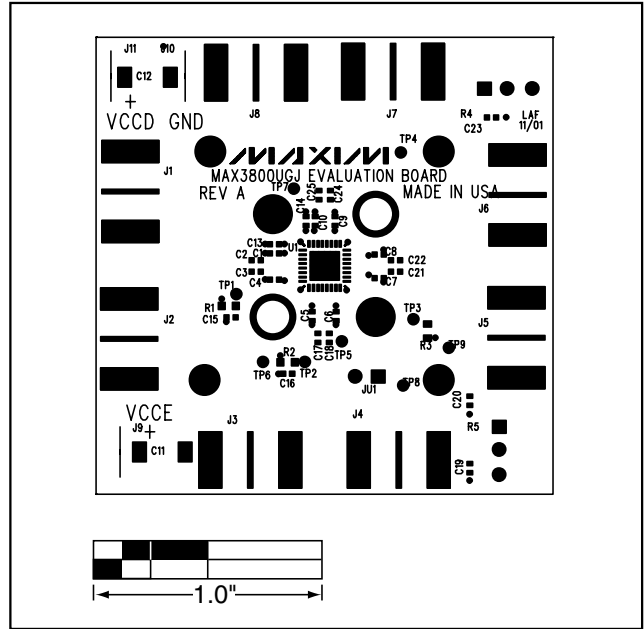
MAX3800UGJ EV Kit—Component Placement Guide
